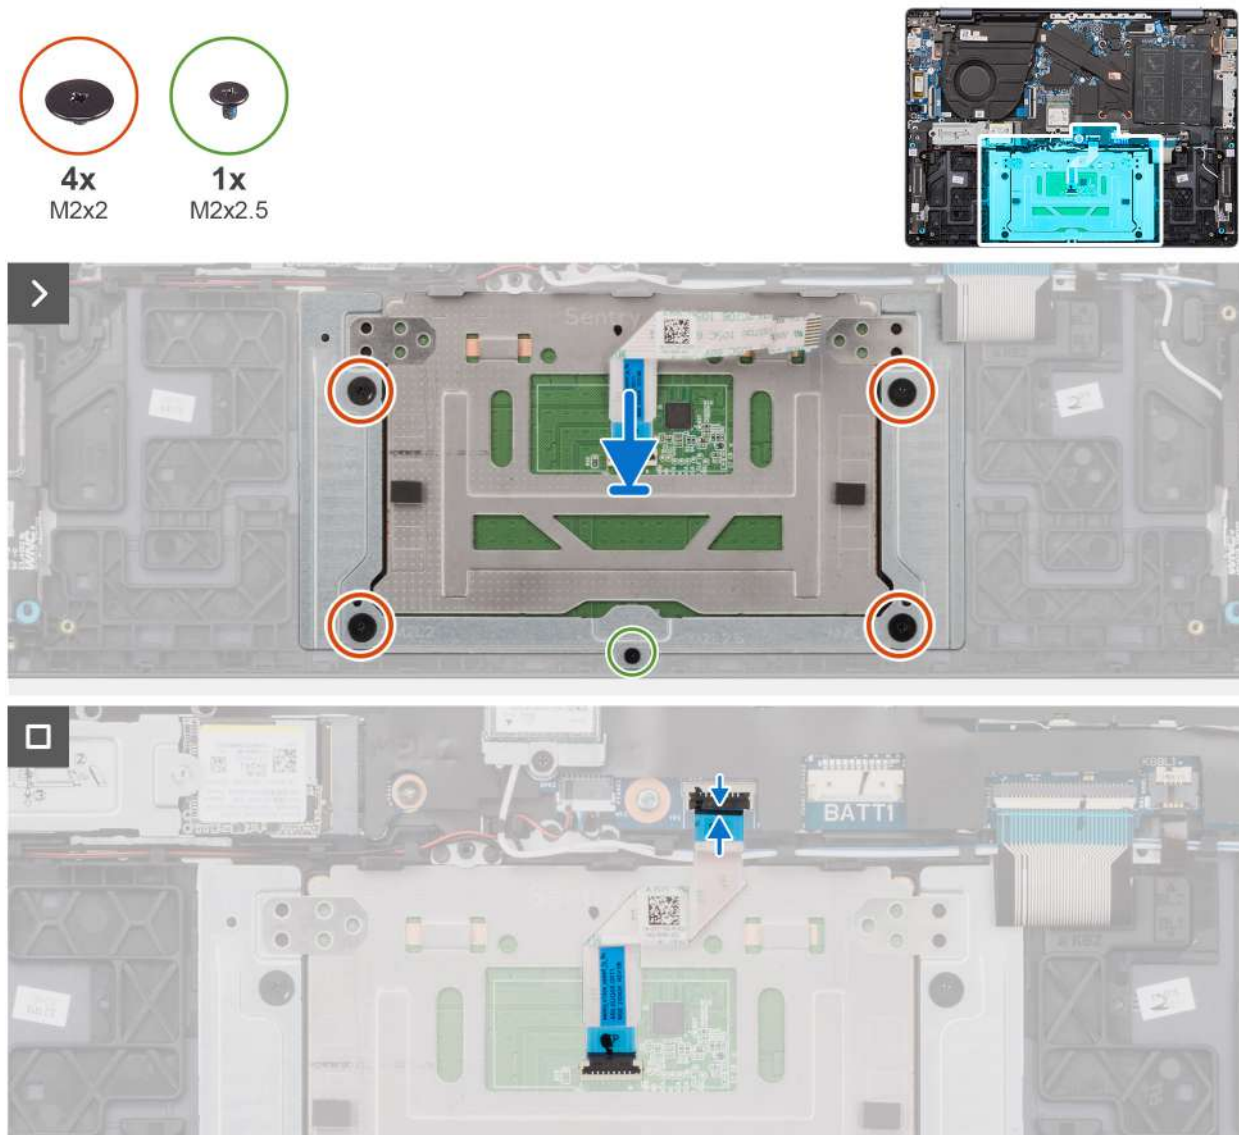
Installing the touchpad (for computers shipped with an aluminum chassis)
